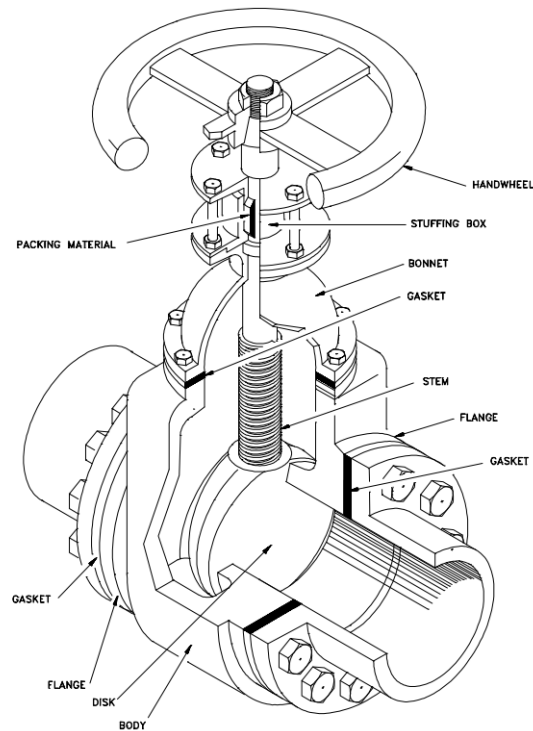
Illustration of typical valve parts (Seridium, n.d.)
